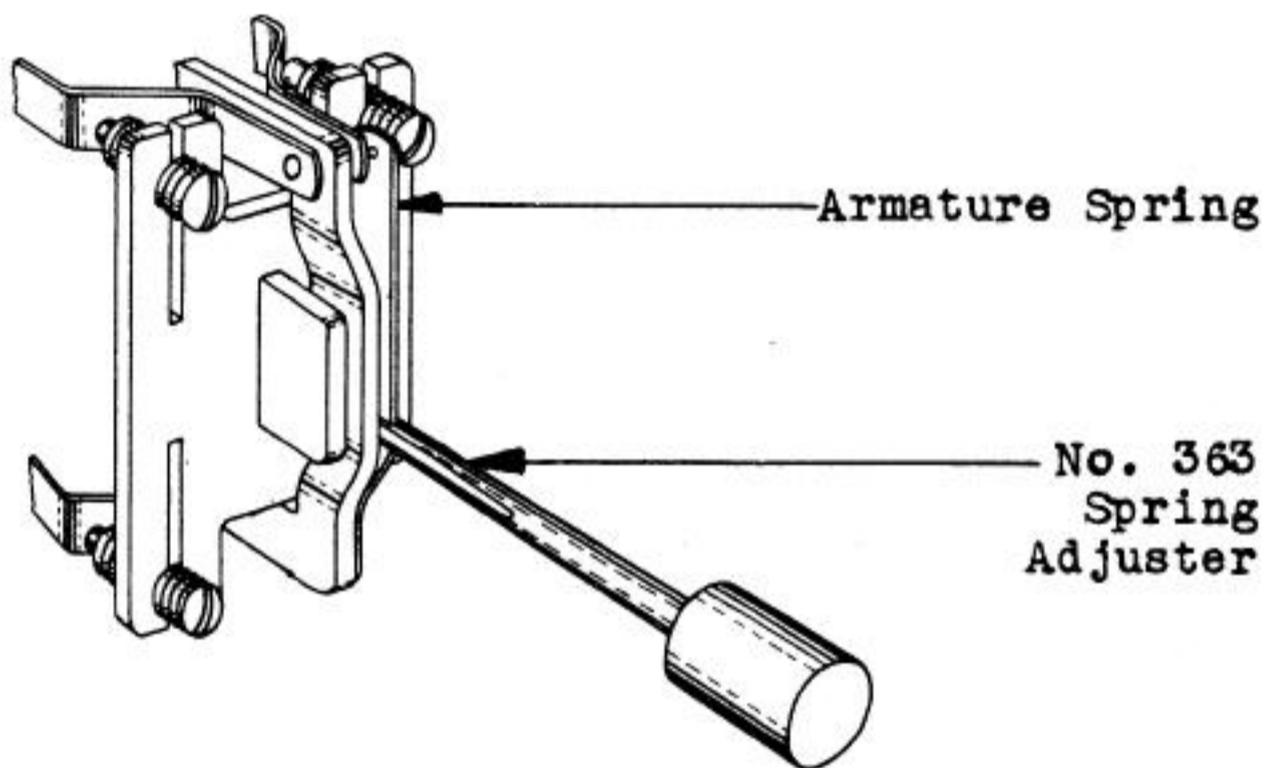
Method of Adjusting Armature Spring for Minimum Front Contact Make
